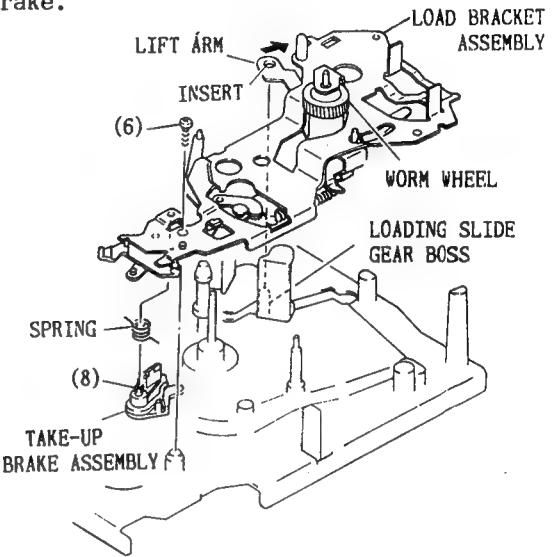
Load Bracket Assembly and Take-up Brake
